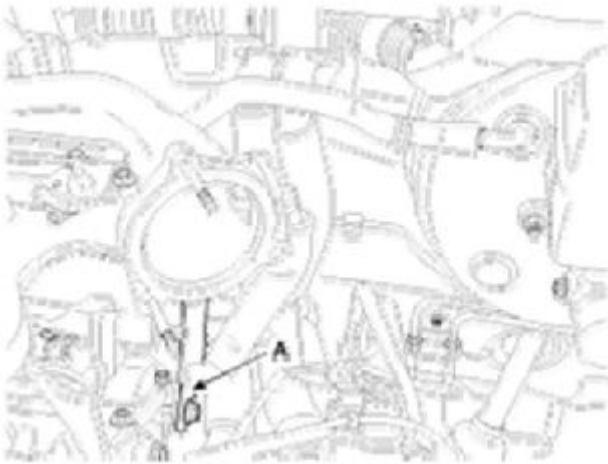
Identifying Surge Tank Stays (1 Of 2)
